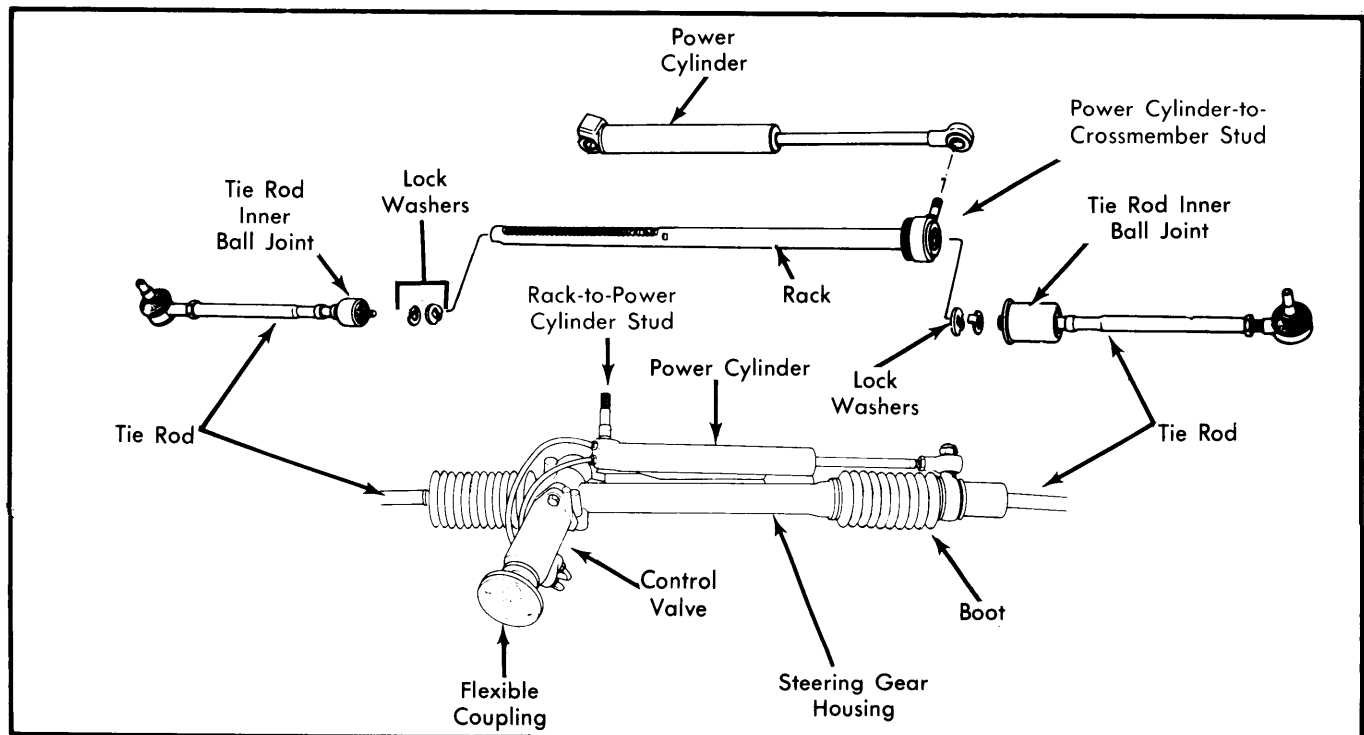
Peugeot Power Assisted Rack and Pinion Steering Gear
